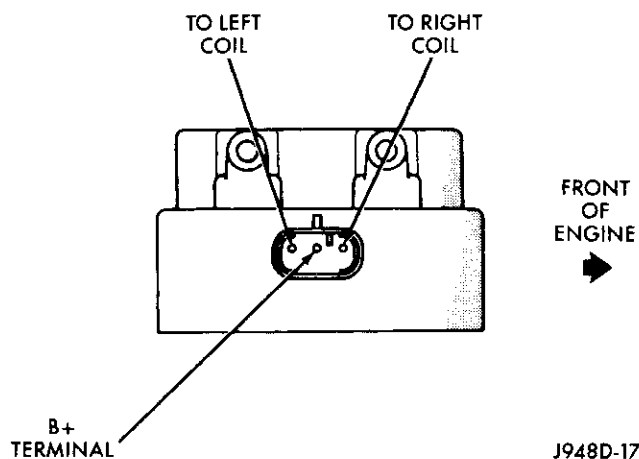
Checking Coil Primary Resistance—Rear Coils—8.0L V-10 Engine
